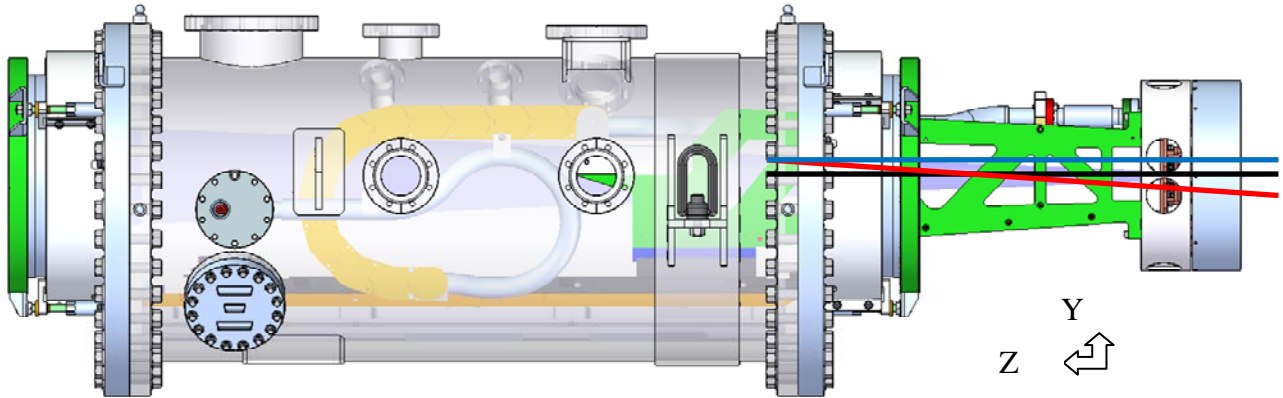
Detector Stage Chamber (Assembly SA-391-520-02), Side View
